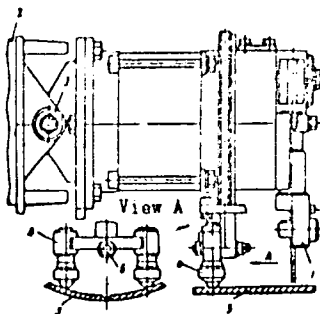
1 - welding head; 2 - arm; 3 - arm hinge; 4 - bearing rollers; 5 - boiler shell; 6 - hinge
